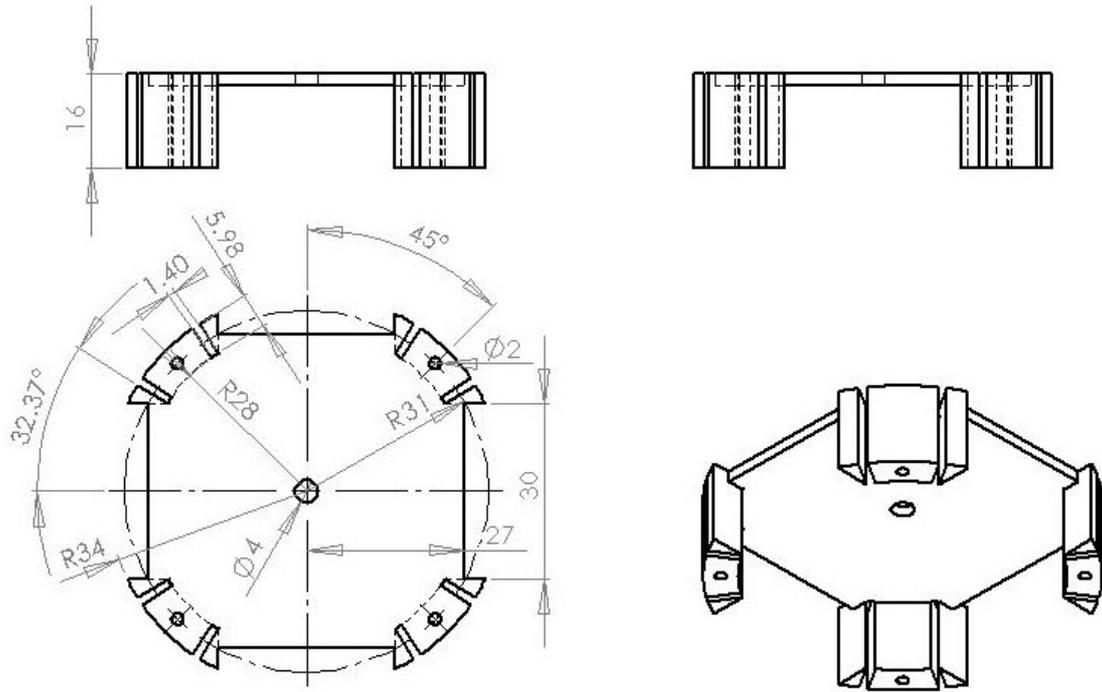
CAD drawing of top part of PVC disk for soft shell prototype.
